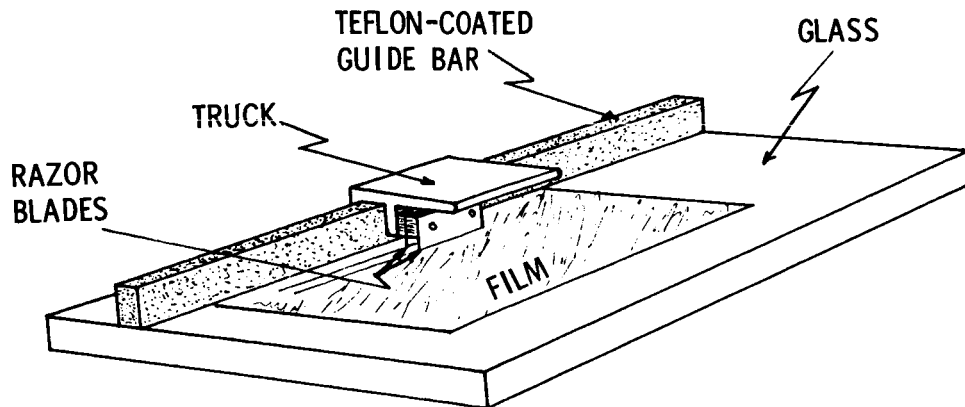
Fixture for cutting strips from film for mechanical and electron paramagnetic resonance specimens.
